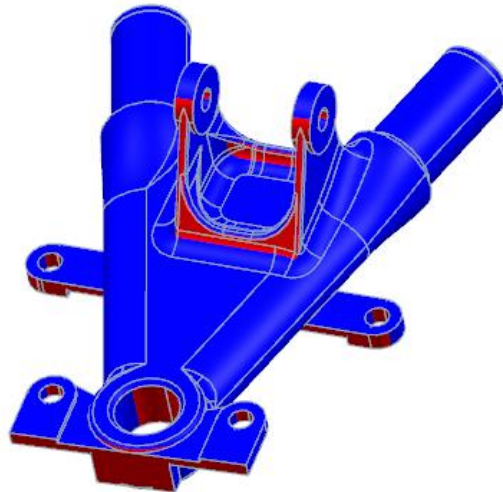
Rear right carbon fibre wishbones final CAD design and render.
